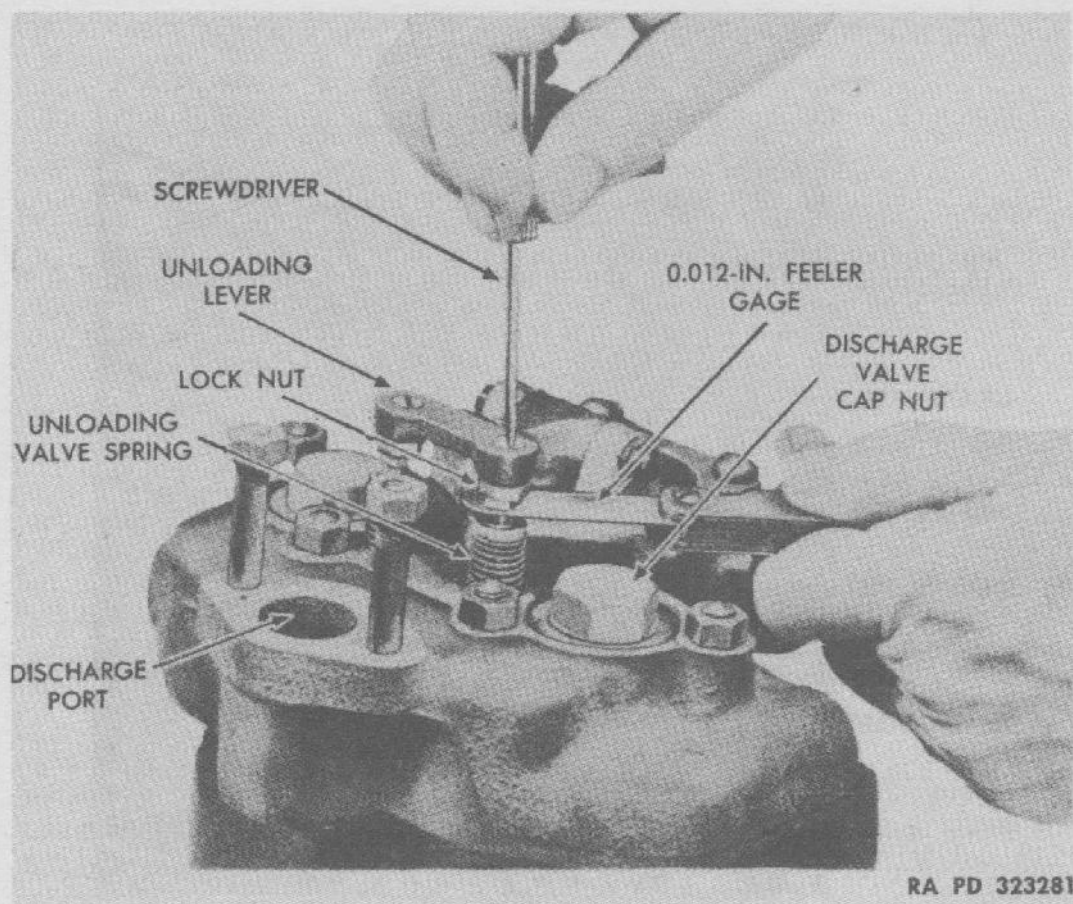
Adjusting Compressor Unloading Valve Clearance
